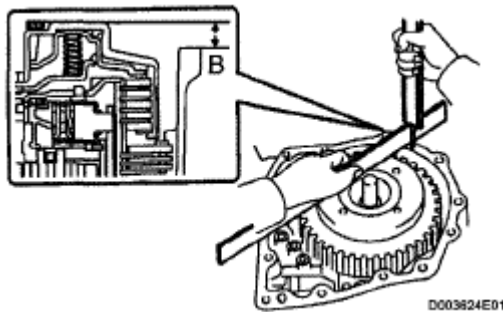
Measuring Distance Between Transaxle Case And Straight Edge Using Vernier Calipers
